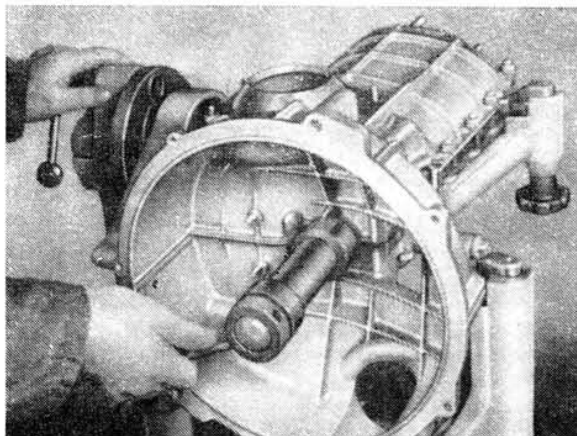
/1 – Removing Clutch Throwout Bearing Guide Using MP 3-102 Jig
